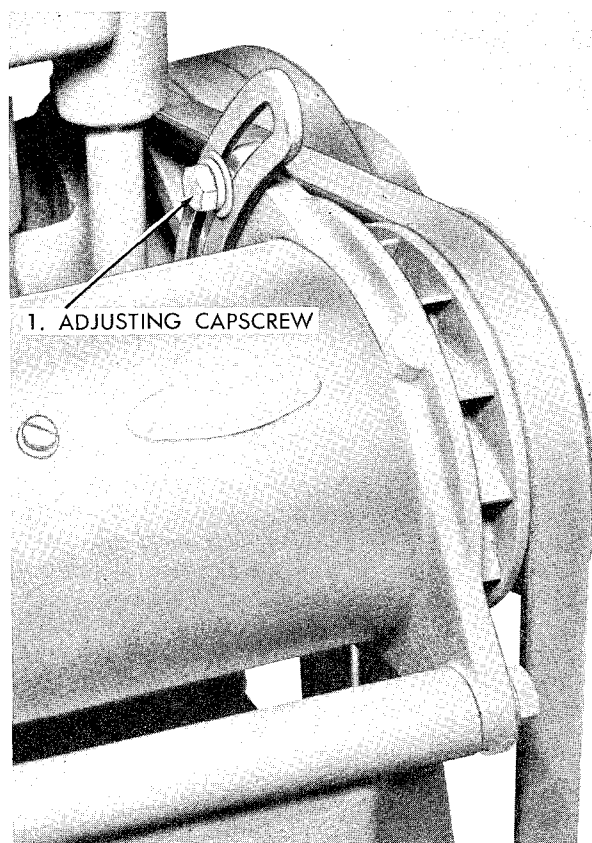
Generator, Fan, and Water Pump Drive Belt Adjustment (T-28746)
